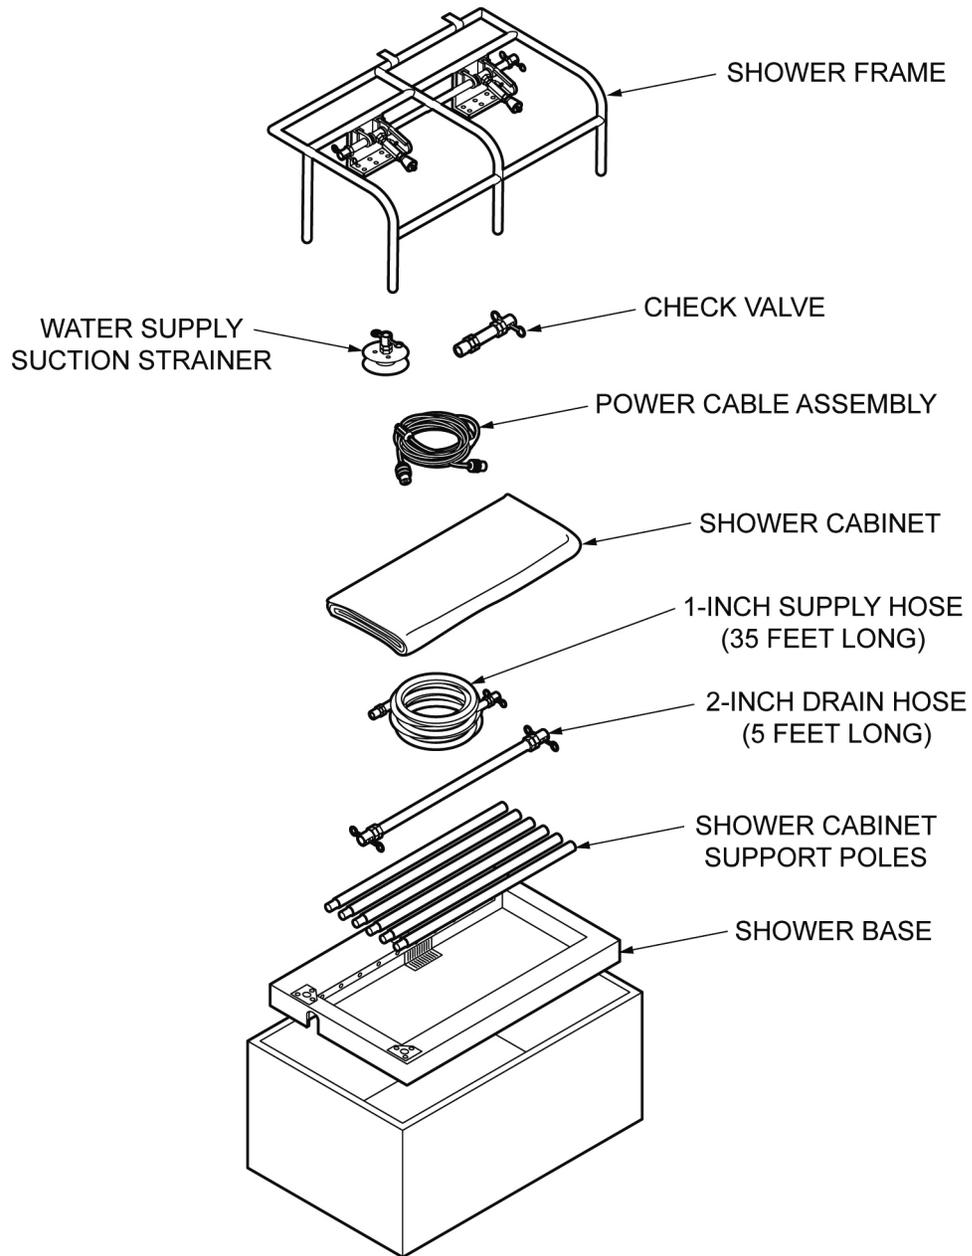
Packing the 12-Head Shower (Sheet 5 of 6).
